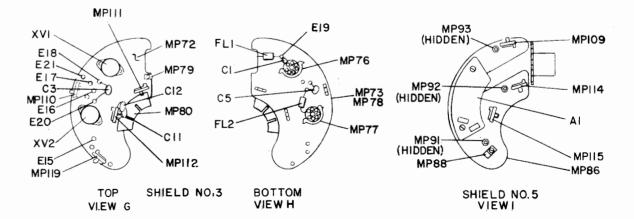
RF Chassis Assembly (P/O A2A4), Component Locations
